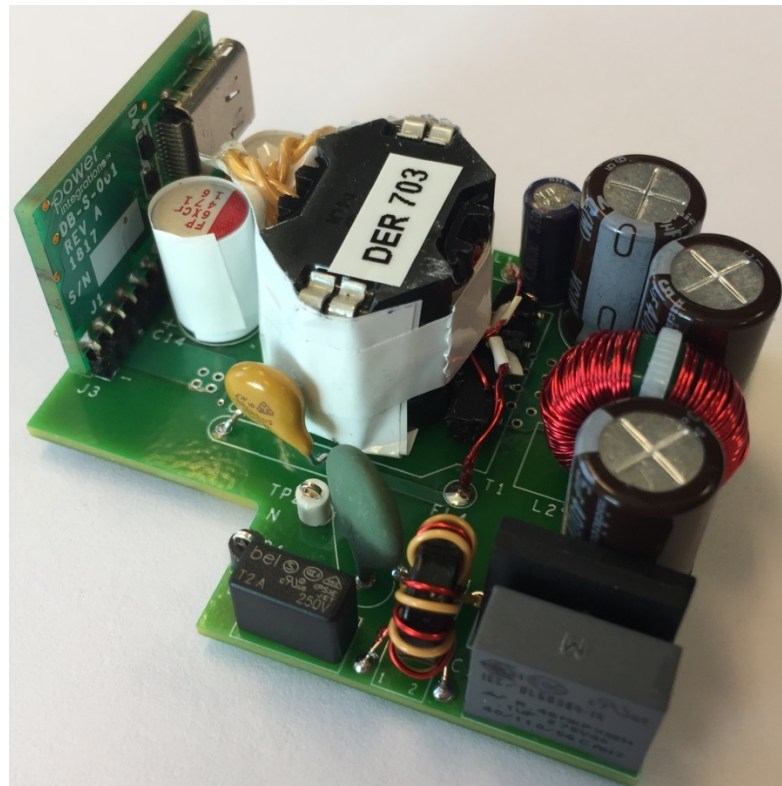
Populated Circuit Board Photograph, Entire Assembly.
